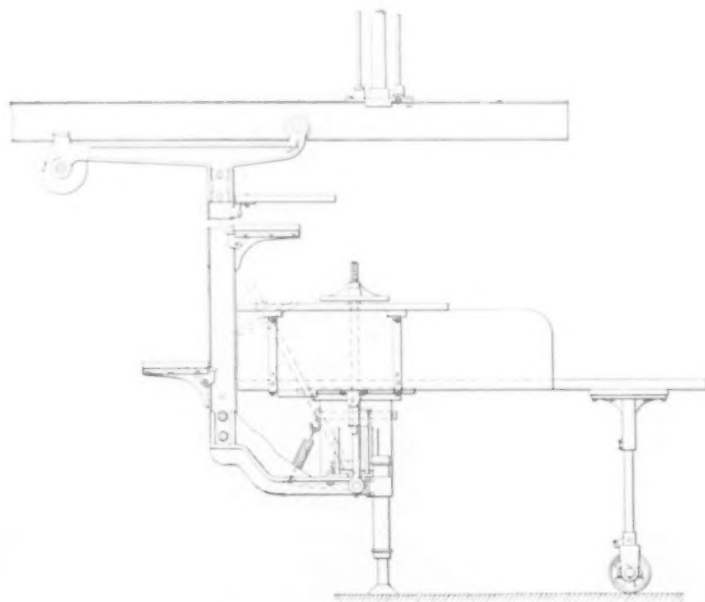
HOWE SUSPENDED MOLDING MACHINE WITH SQUEEZER ATTACHMENT
